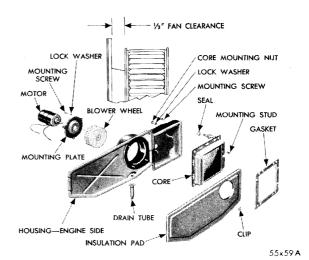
Blower and Motor Assembly, Heater Core and Insulation to Heater Housing (Engine Side)
